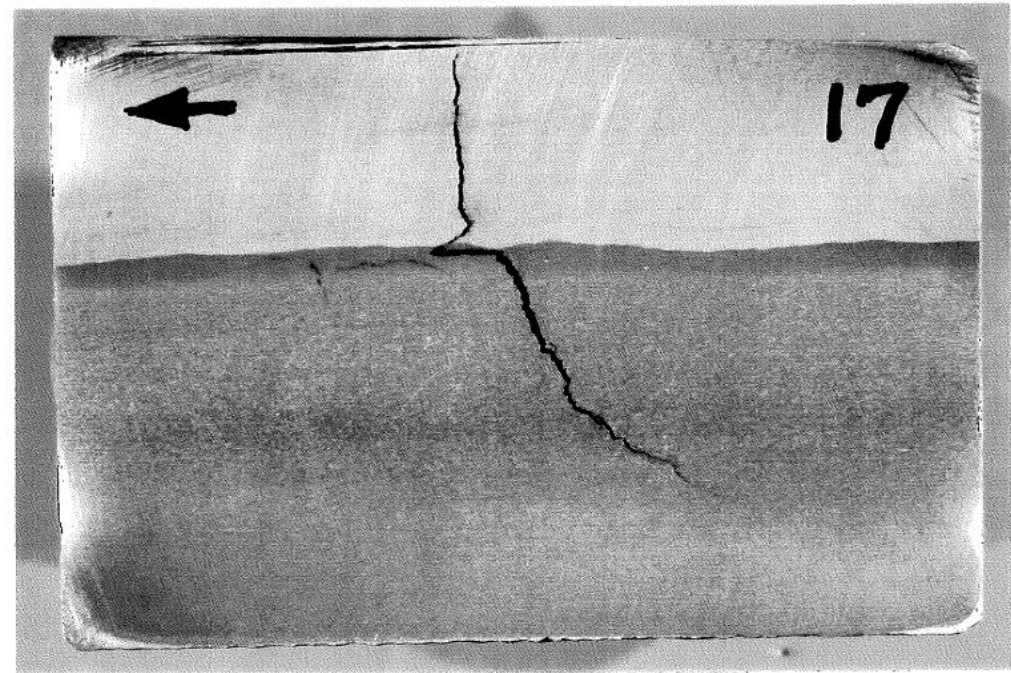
Longitudinal Cross-Section through Core #17 Showing a Transverse Weld Metal Crack and Propagation of the Crack into the Flange. Arrows Show HAZ Cracks and their Propagation into the Base Metal Adjacent to Primary Crack.
